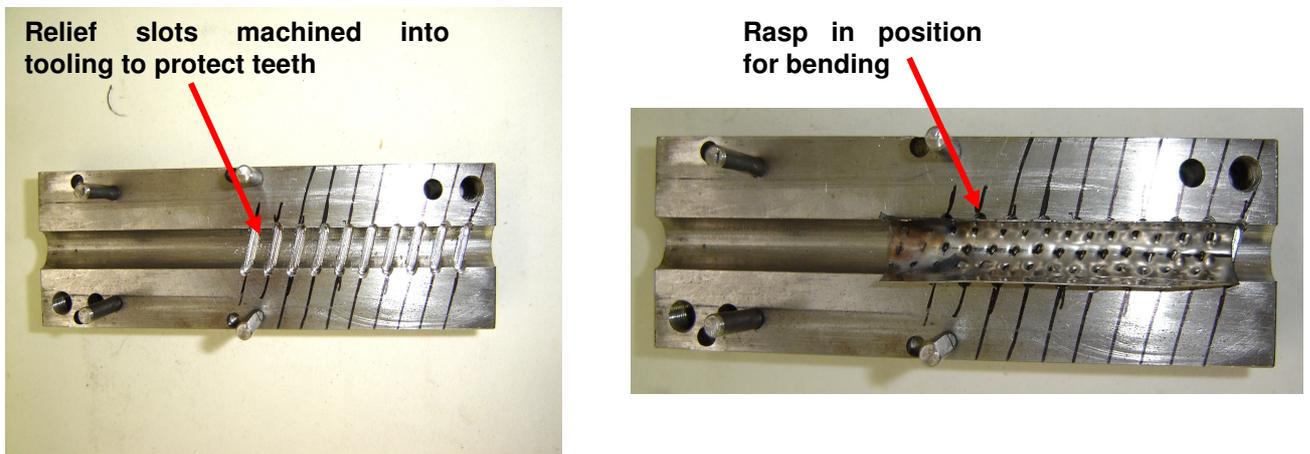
Photographs of modified tooling designed to protect the pre-cut cusps during the forming operation.
